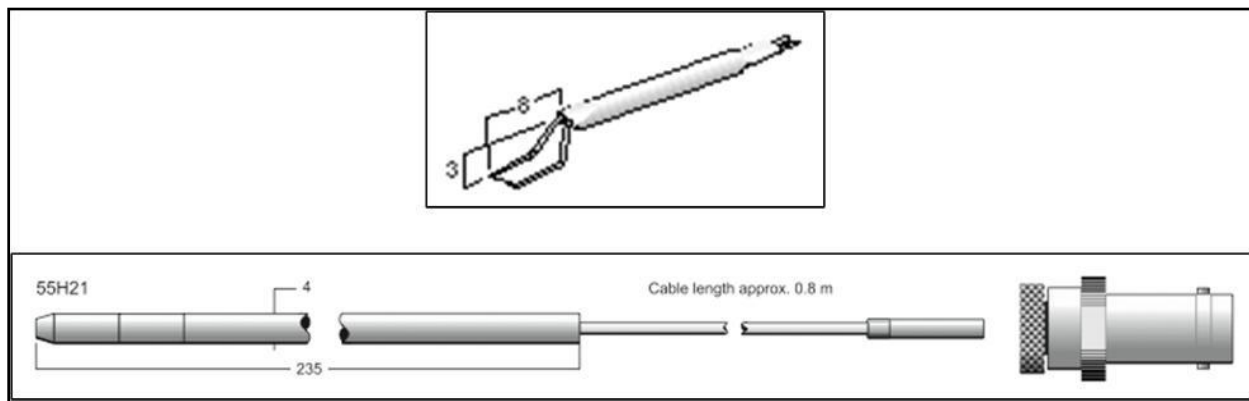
Dantec boundary layer hot-wire probe (top) and probe support (bottom), dimensions in mm.
